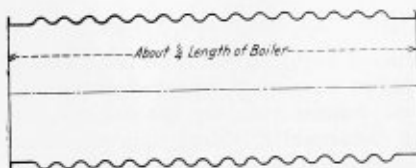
Corrugated Section as Fitted to Take Up Expansion of Flues. The Fitting of These Reduces Breathing Space
